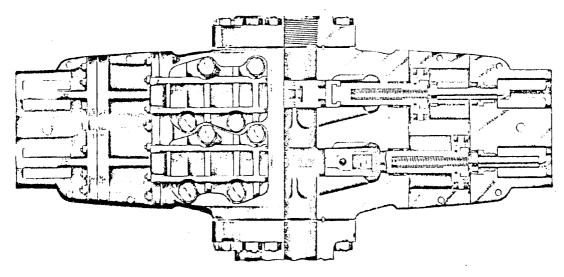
Shafter Type E Hydraulic Double Blowout Preventer—Front View
